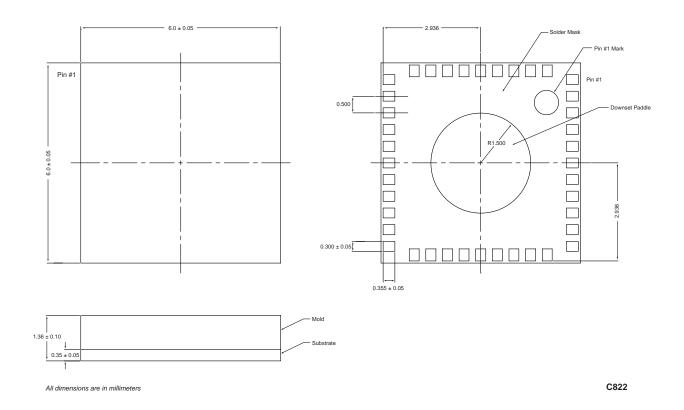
RF25B Tx ASIC Package Dimensions - 40-pin LGA 6x6 Package
